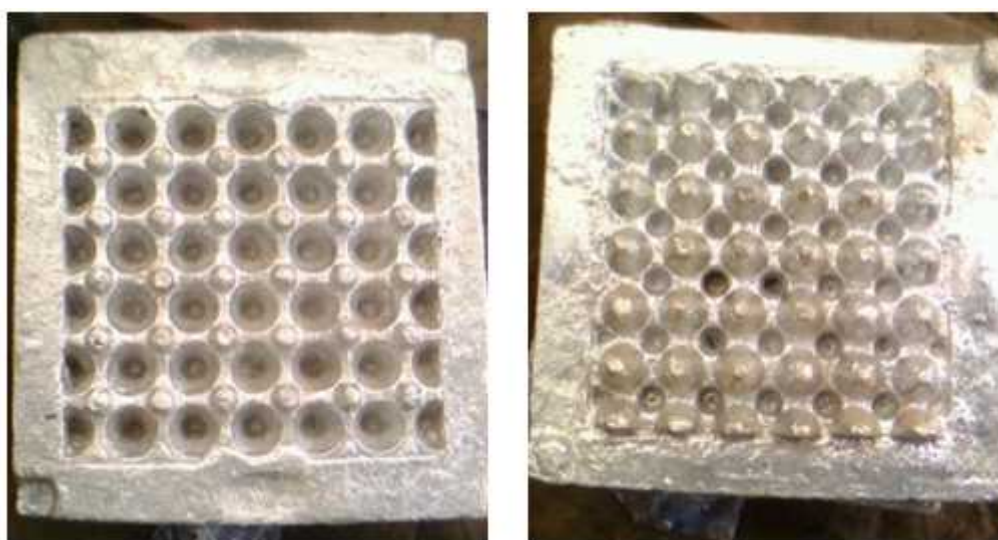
Left: Finished sand mould (Drag); RIGHT, finished sand mould (Cope)
